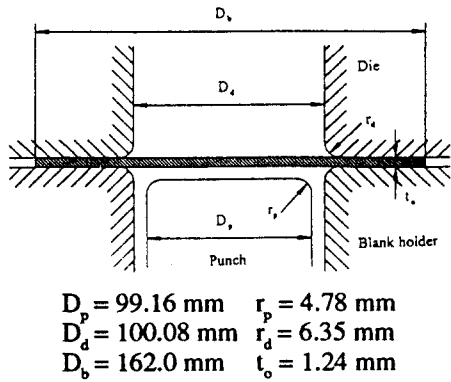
Schematic view of geometric description for cylindrical cup deep drawing
